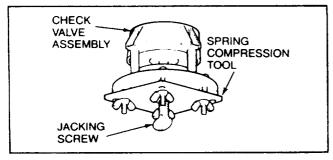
CLEANING 11/4", 11/2" AND 2" CHECK VALVE
